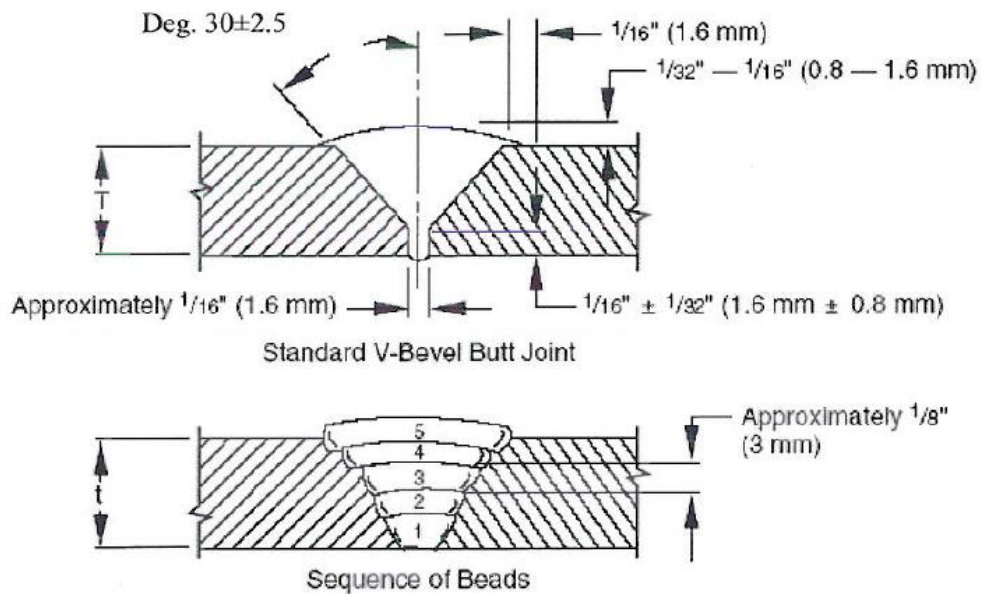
Sketch showing joint design for 10” Dia pipe
